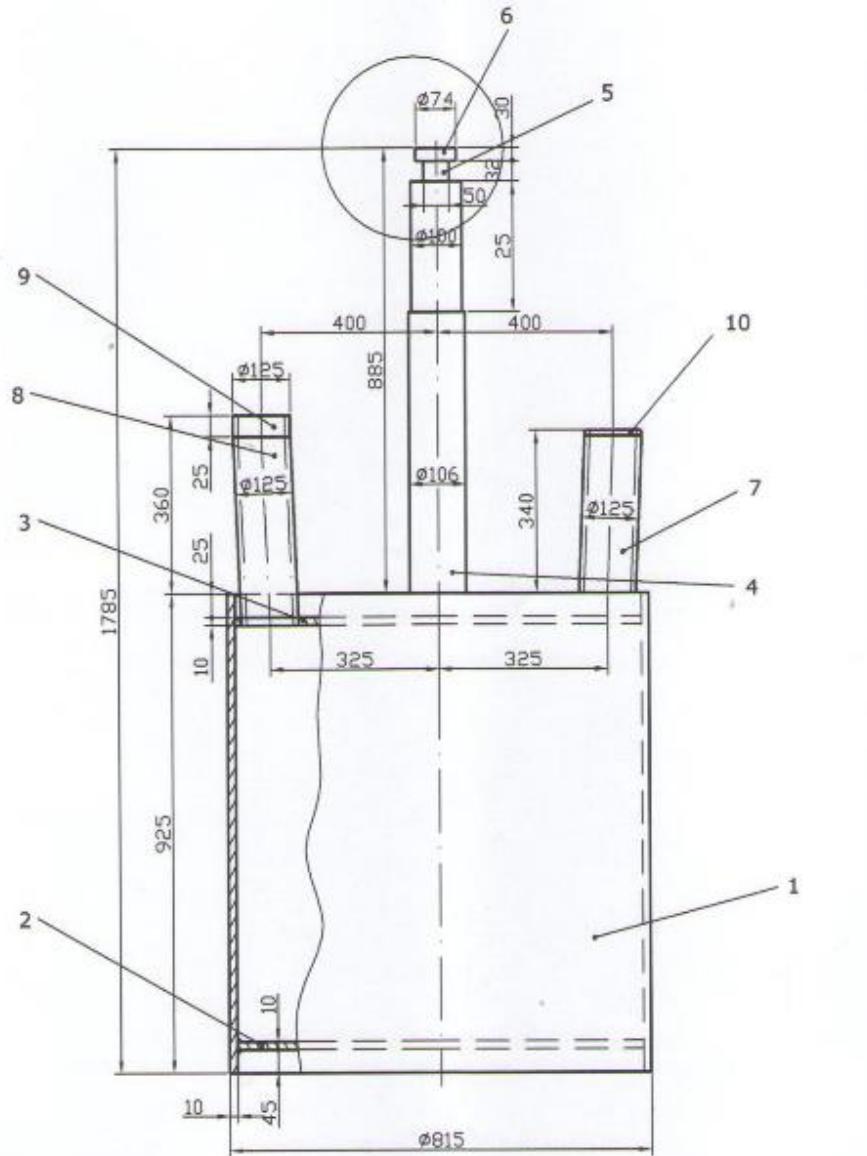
Rotary tubular furnace, general technical drawing for identifying the main dimensions.
